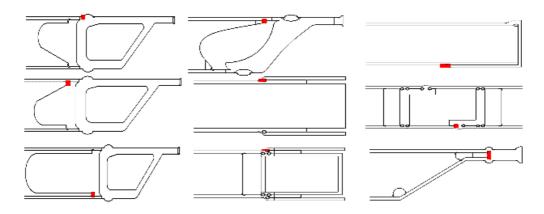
Various joint geometries for laser welded sandwich panels.
